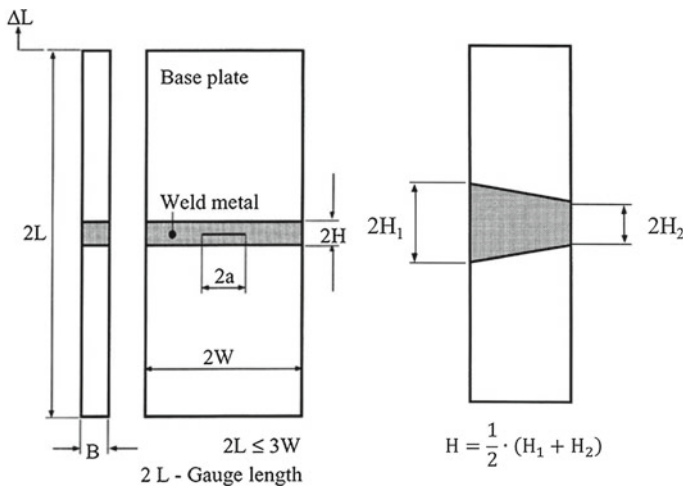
Definition of the weld width height $2H$ of a V weld. [18]
